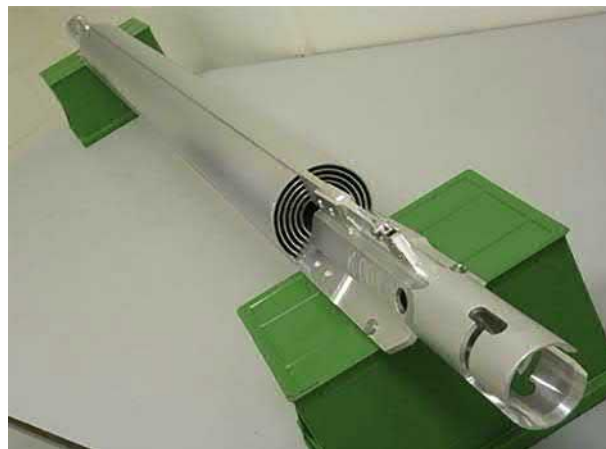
A standard driver fuel element of the BR2 reactor, consisting of six concentric tubes, formed by three plates, swaged into stiffener plates.
